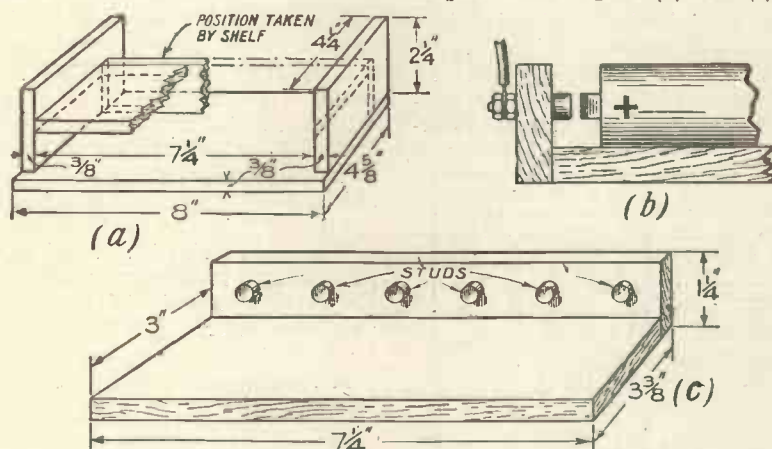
Details of the containing box, showing the positions of the studs, and the method of making contact with the batteries.
